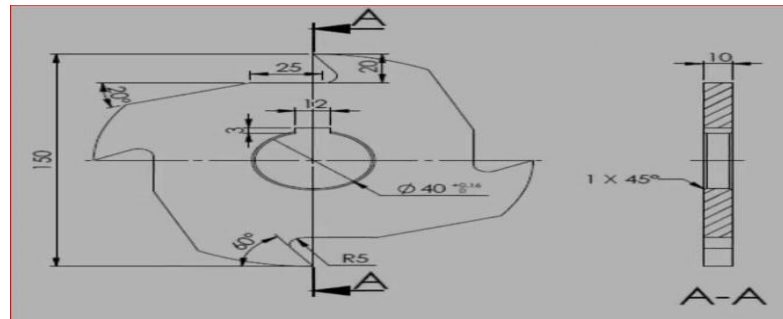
Design and production of plastic shredder machine cutter model 1 [17]
